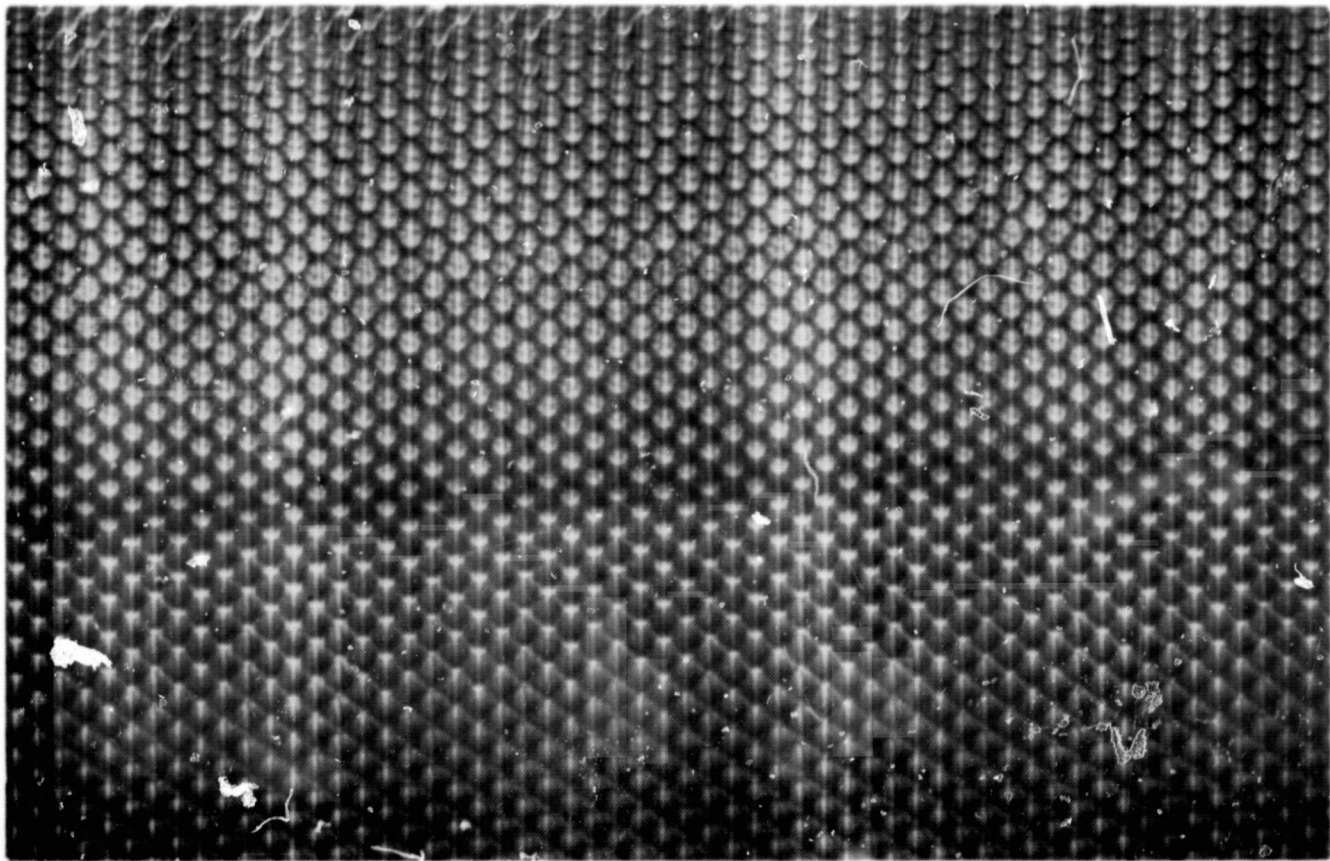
Typical x-ray view of honeycomb panel L9000002-1001 - top surface.
